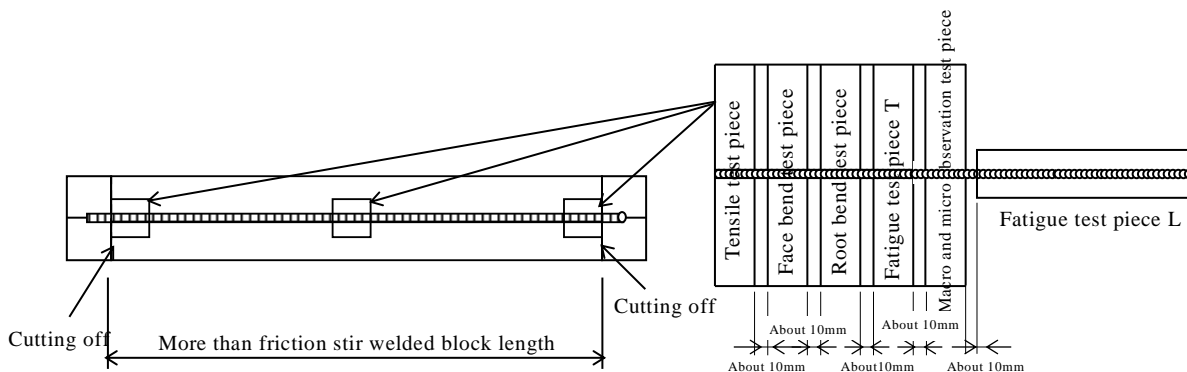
Specimen Used for Welding Tests
